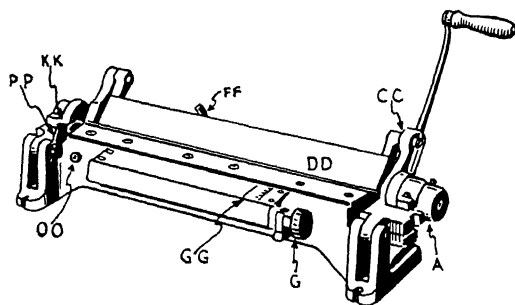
Bar folder. CC, folding bar; GG, gauge indicator and scale; G, gauge knob; OO, lock screw for locking gauge after setting to scale; FF, lever to regulate sharpness of bend; DD, bending wing; PP, stop gauge, 90 deg.; KK, stop gauge, 45 deg.; A, adjustable stop gauge
